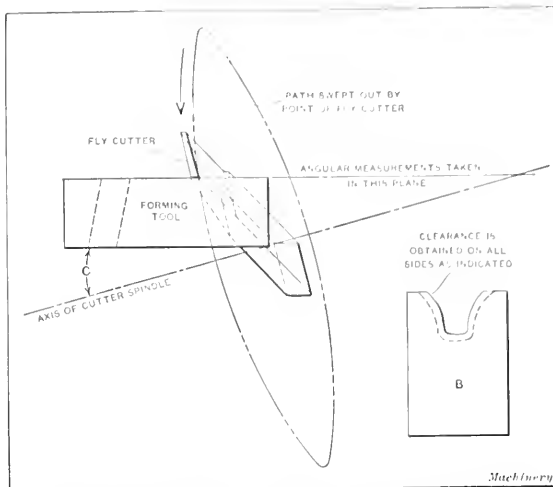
Method of setting the Fly Cutter to give the Required Side Clearance to the Forming Cutter
